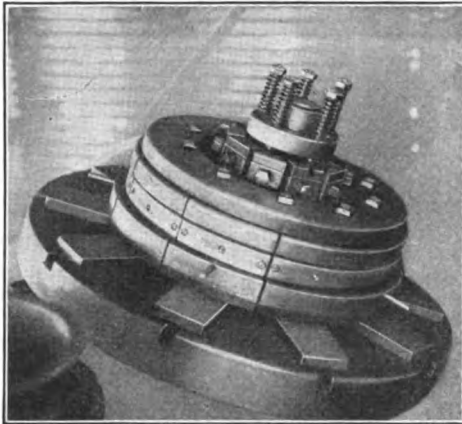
A CLOSER VIEW OF THE STRETCHING HEAD
